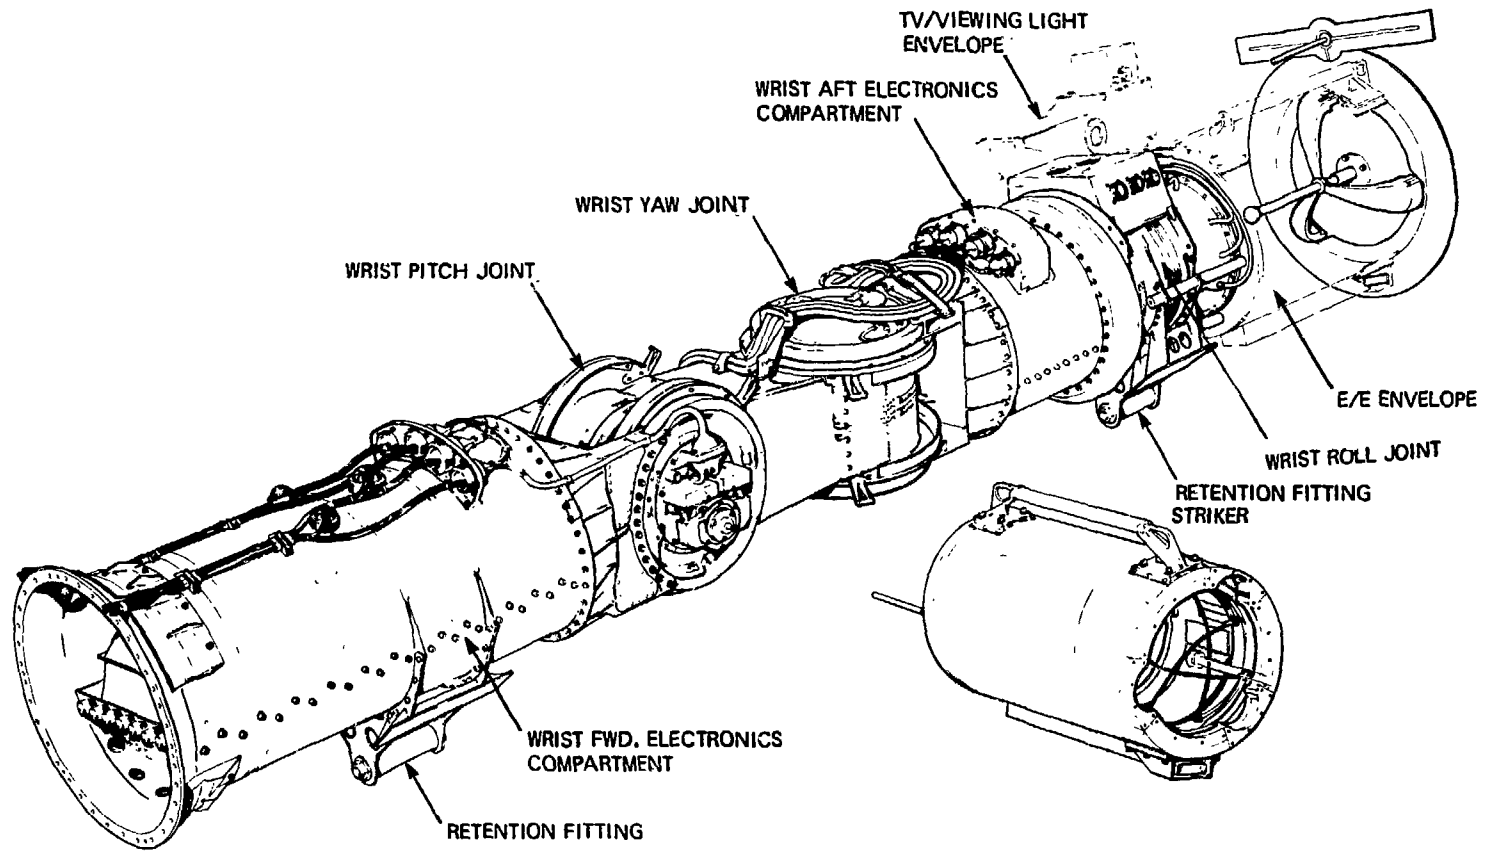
SRMS WRIST ASSEMBLY AND END EFFECTOR
